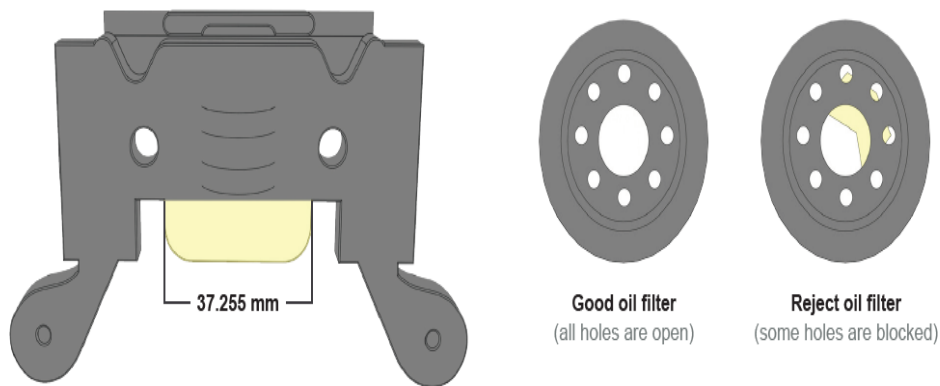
Machine vision systems can process real-time measurements and inspections on the production line, such as a machined bracket (left) or oil filters (right).
